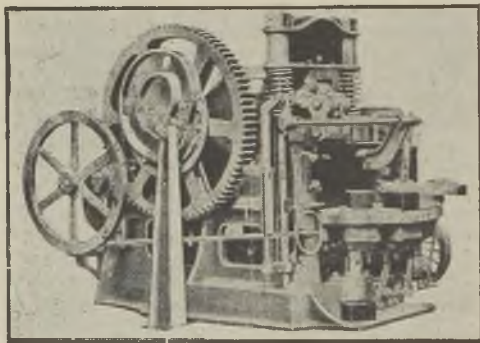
A BRIQUETTING MACHINE FOR BORINGS
